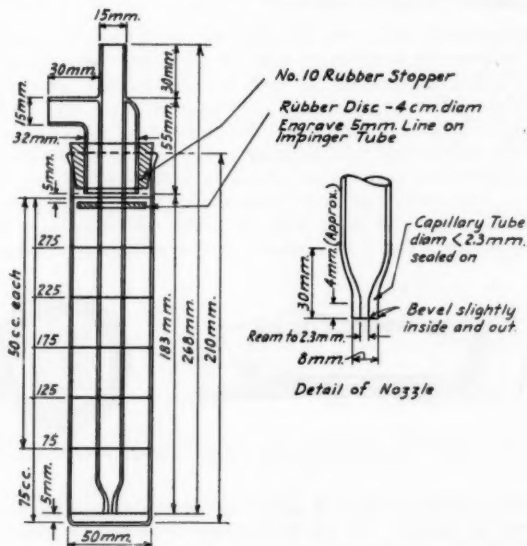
MODIFIED IMPINGER ASSEMBLY AND DETAIL OF NOZZLE, WITH SPECIFICATIONS FOR CONSTRUCTION
